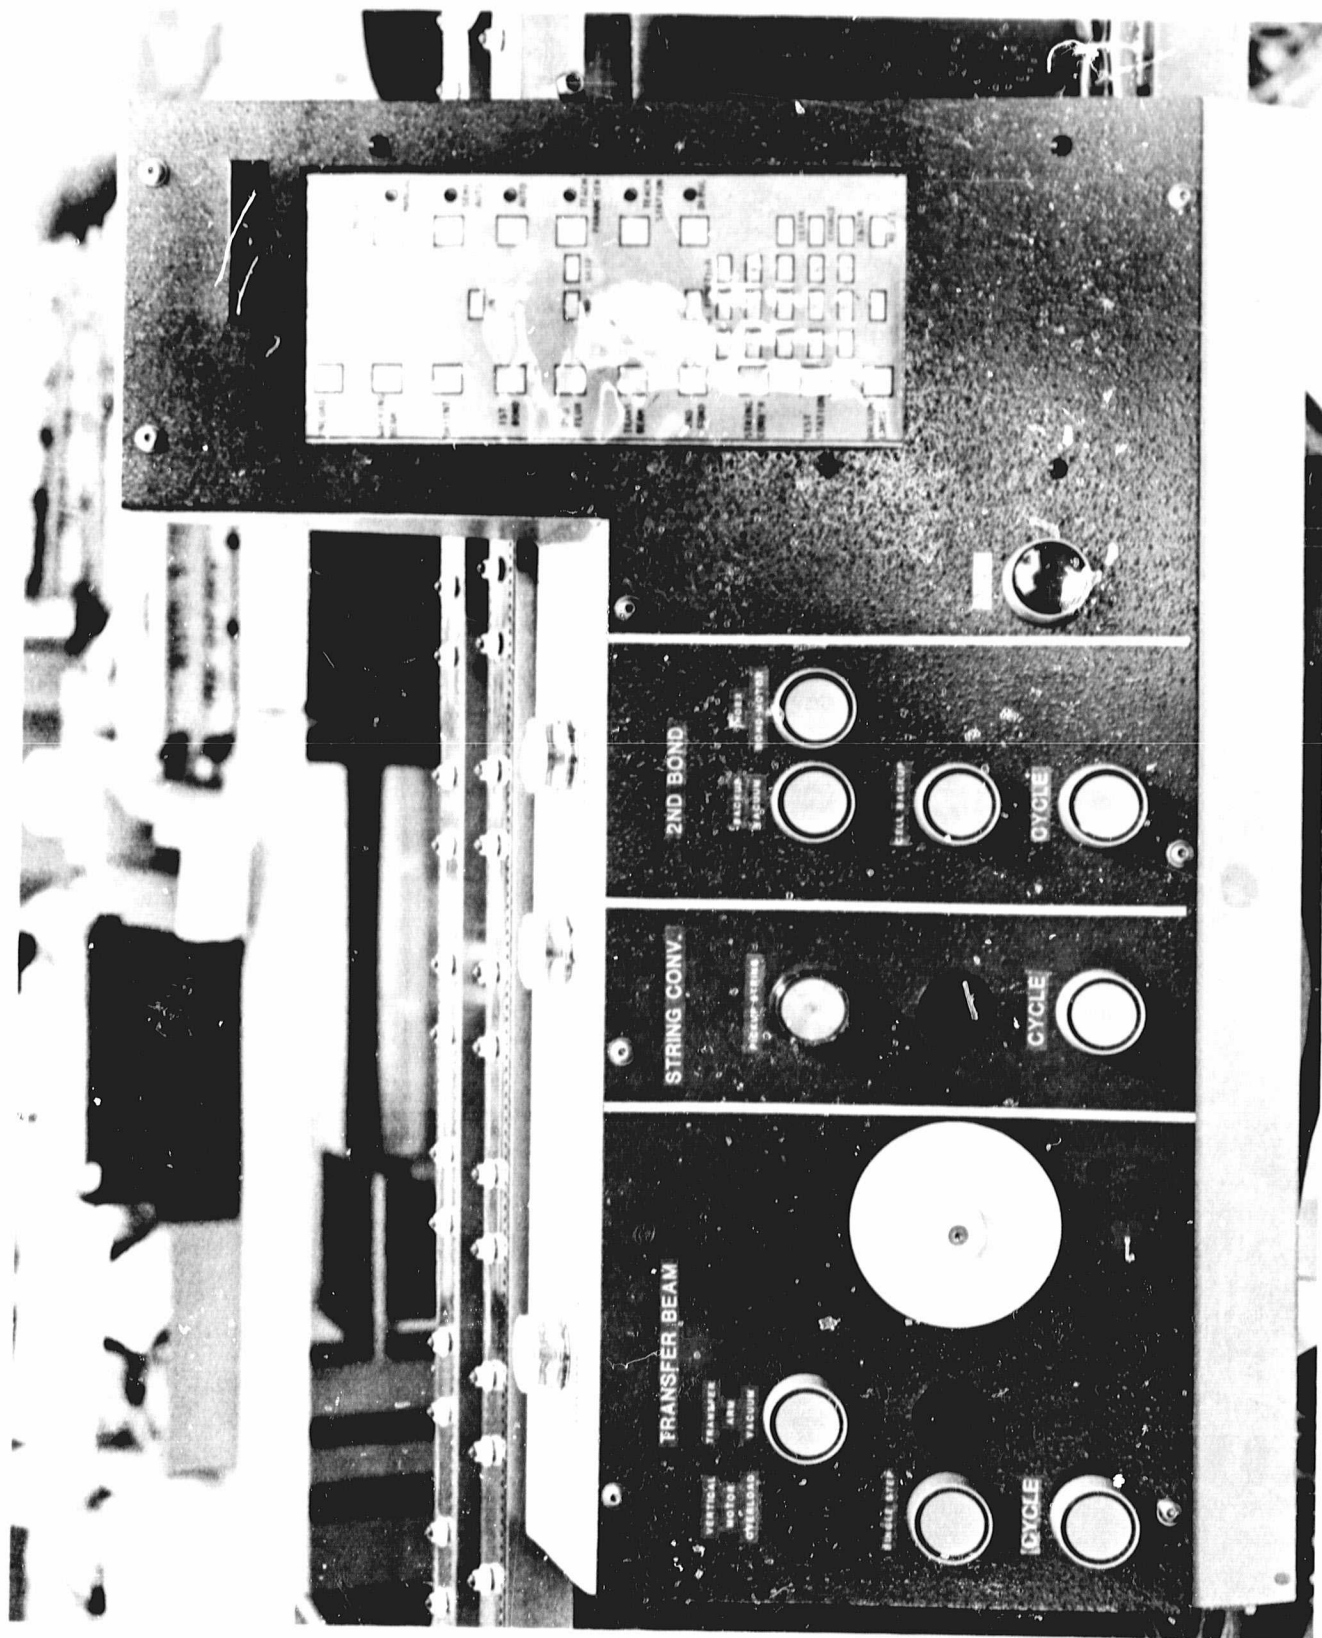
KEYBOARD AND CONTROL PANEL - SECOND HALF OF MACHINE
